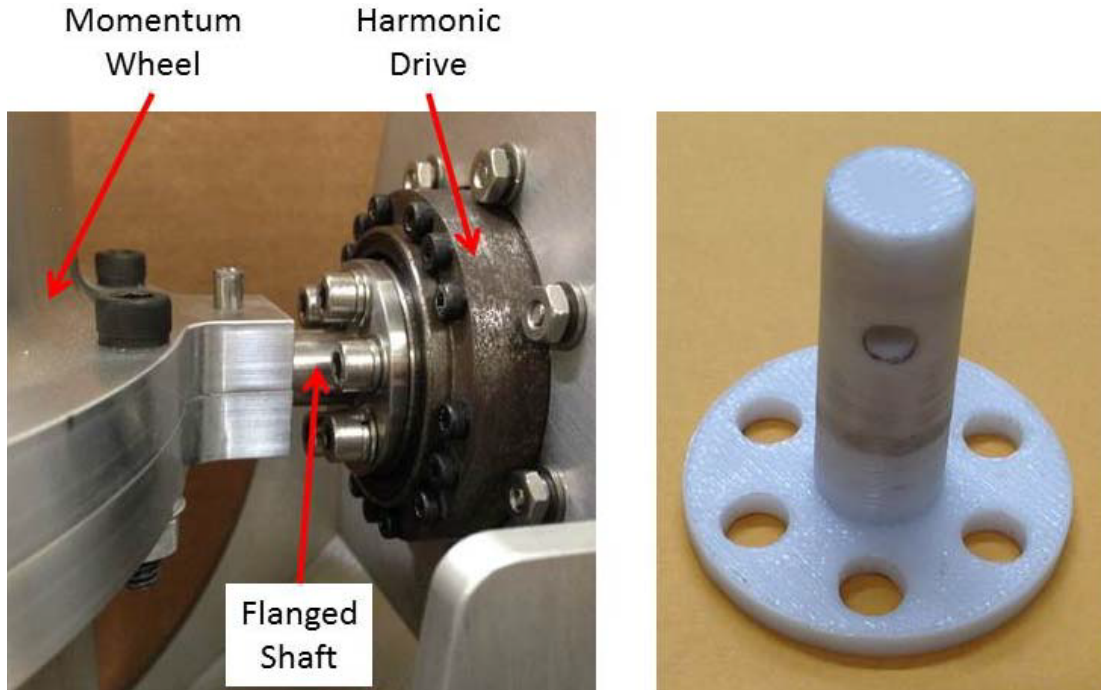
Drive side gimbal shaft, (left) mounted in CMG, (right) 3D printed prototype
